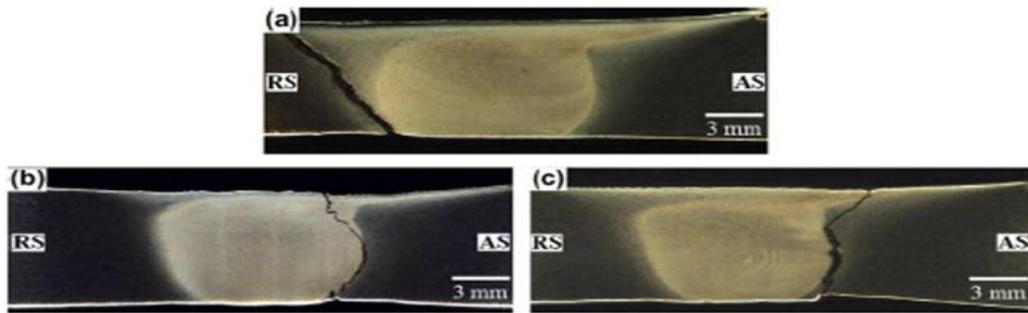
Fracture locations of the joints welded at different welding speeds (a) 50 mm/min (b) 100 mm/min and (c) 150mm/min [64].
